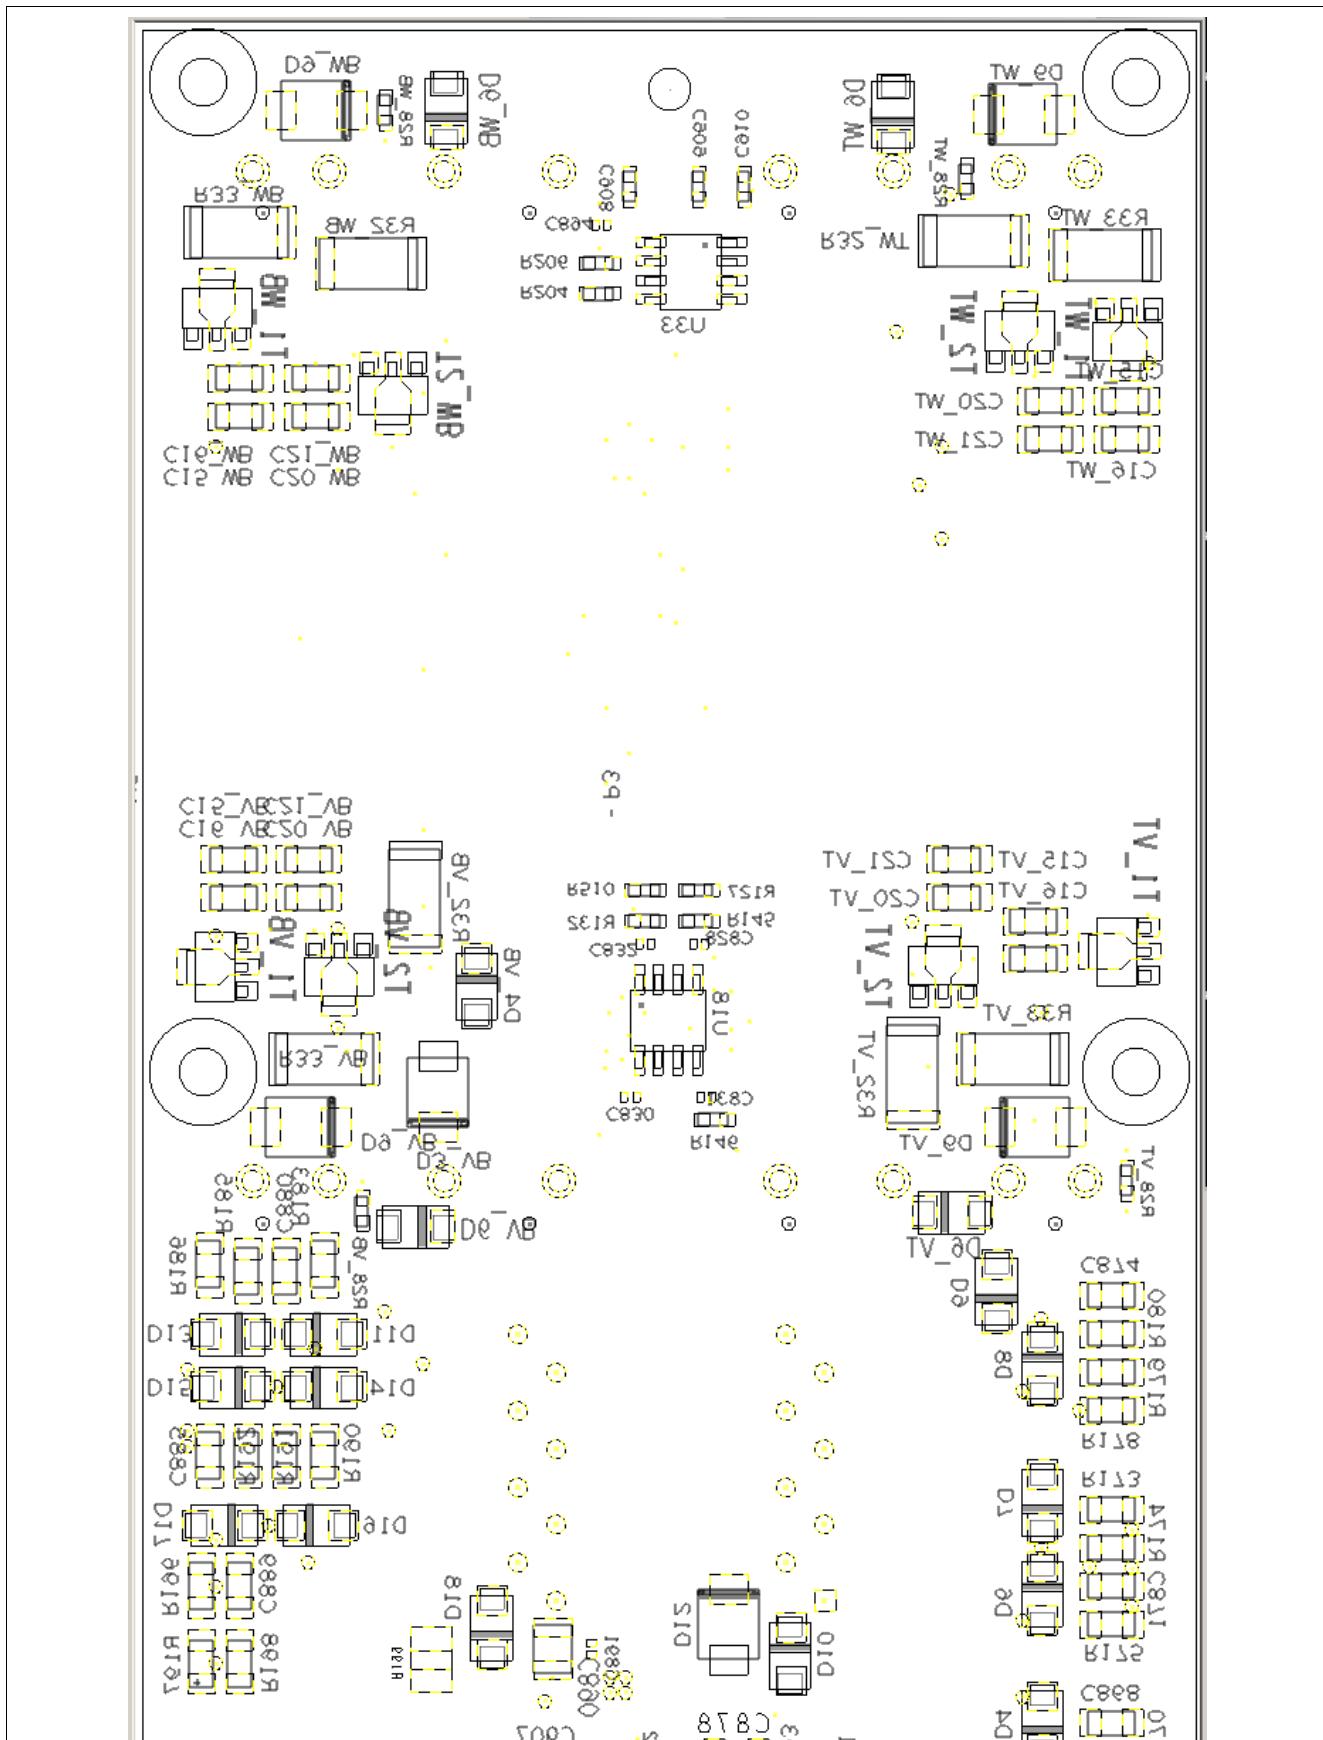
Assembly Drawing of the Driver Board (Bottom) - part 1
